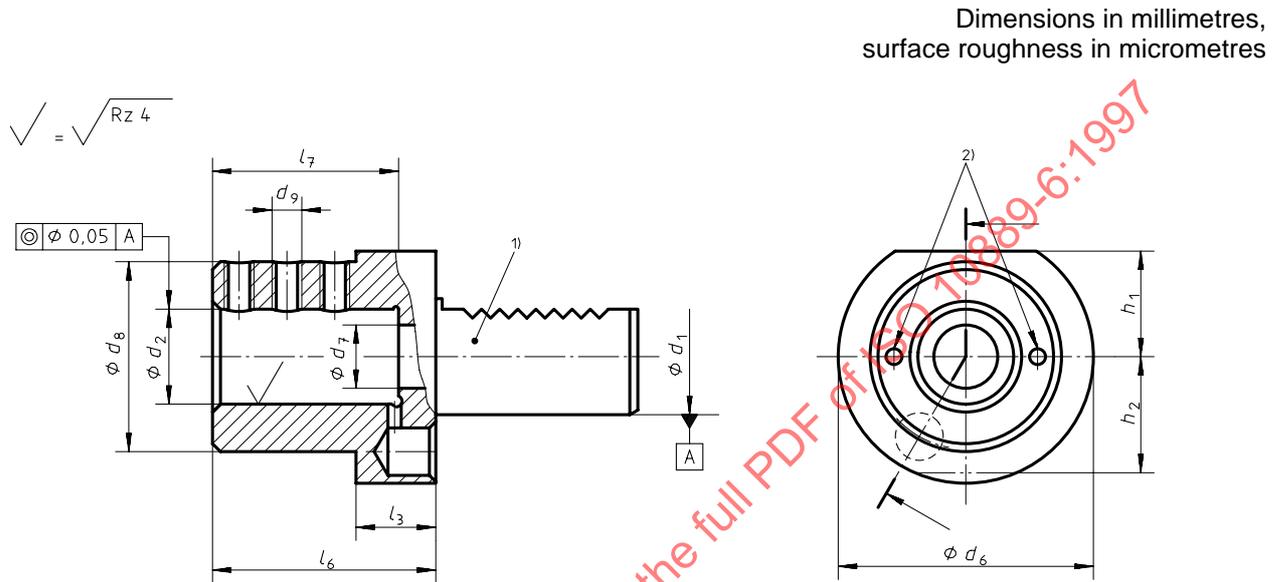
Type E2 tool holder for turning tools with cylindrical shank
